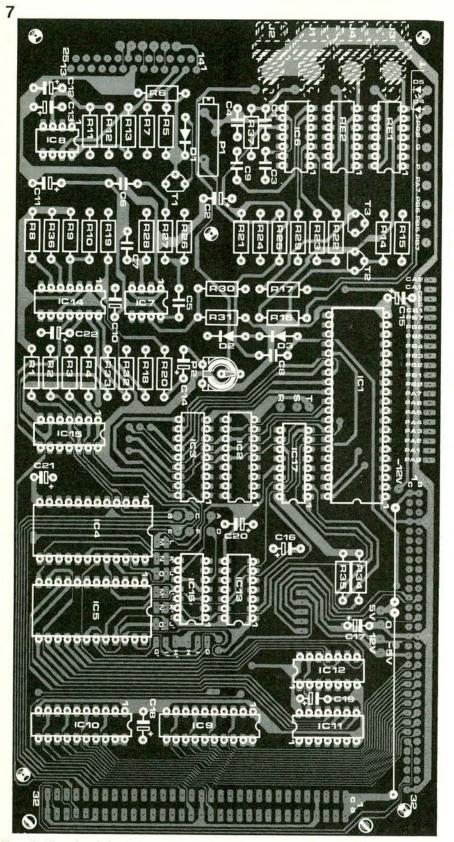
The printed circuit board for the interface card is 'doubled-sided'. Only the component overlay with the corresponding copper track pattern is illustrated.
